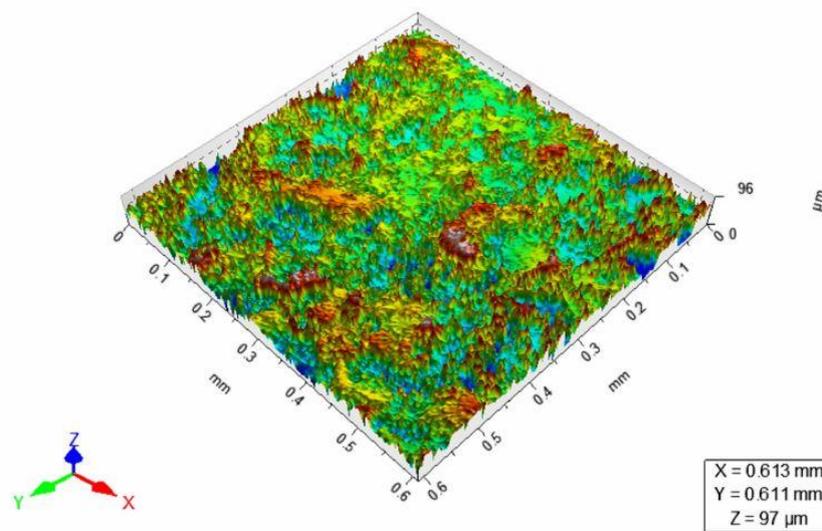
Profilometer 3D view from the surface's roughness of EDM machined sample (smooth process) after coating process.
